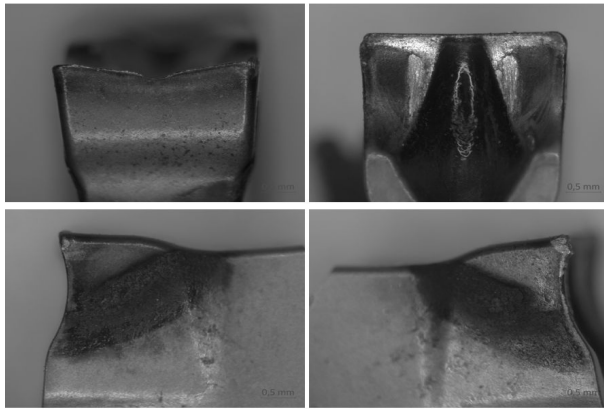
View of the tool wear after 20.4 minutes of major flank (top left), tool face (top right), minor flank (bottom left), minor flank 2 (bottom right)
